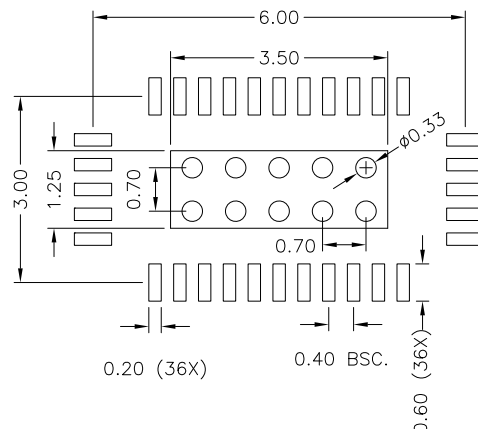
32-contact TQFN (ZL32) Package Mechanical Drawing with Ground Via Information
